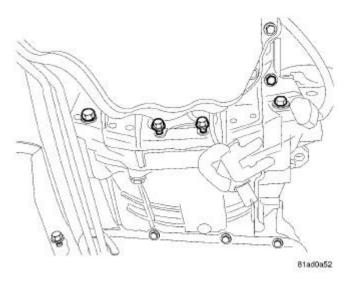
BELL HOUSING BOLTS Courtesy of CHRYSLER LLC
